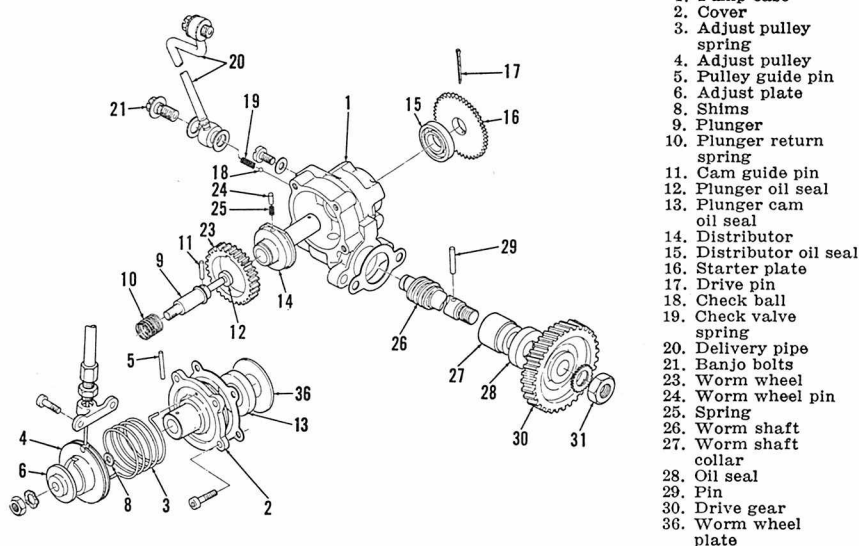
Exploded view of oil pump and metering unit used on YG51 models. Other models with "AUTOLUBE" are similar.
